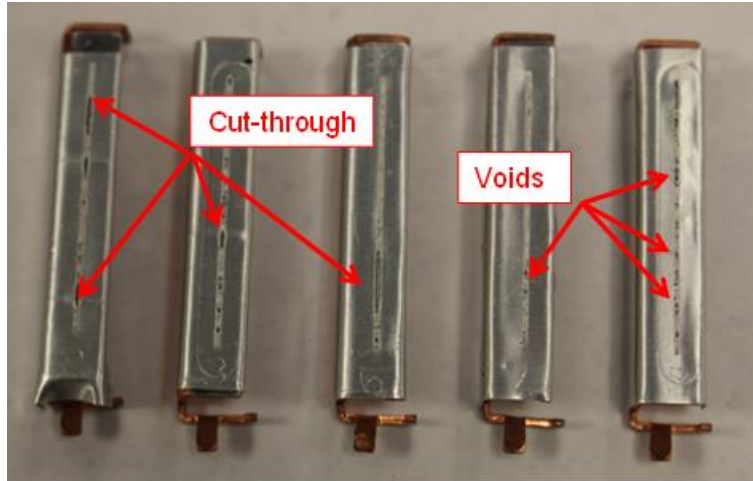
Illustration of five laser weld samples (No. 2, 3, 5, 7, and 8, from left to right)
